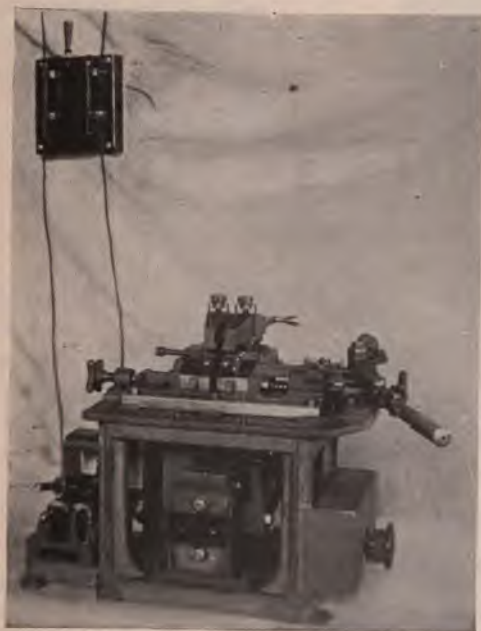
A Small Electric Welding Transformer. The transformer proper is located beneath the work holders. Thomson Electric Welding Co.
